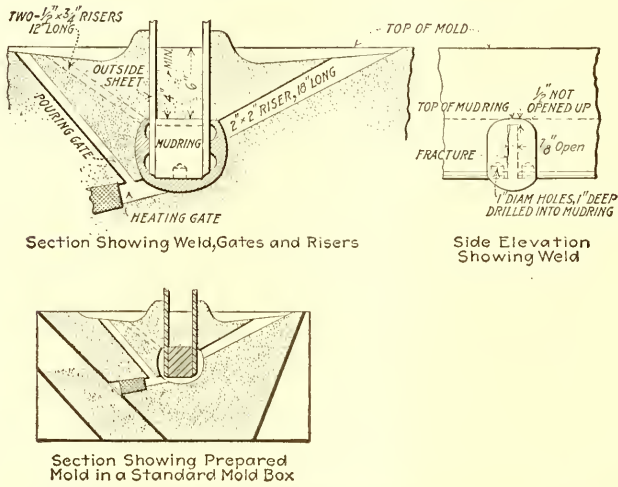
Mold for Welding Mud Rings Without Cutting Sheets.
